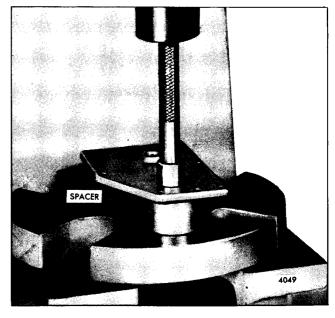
Removing Governor Cover Bearing using Tool J 21967-01
